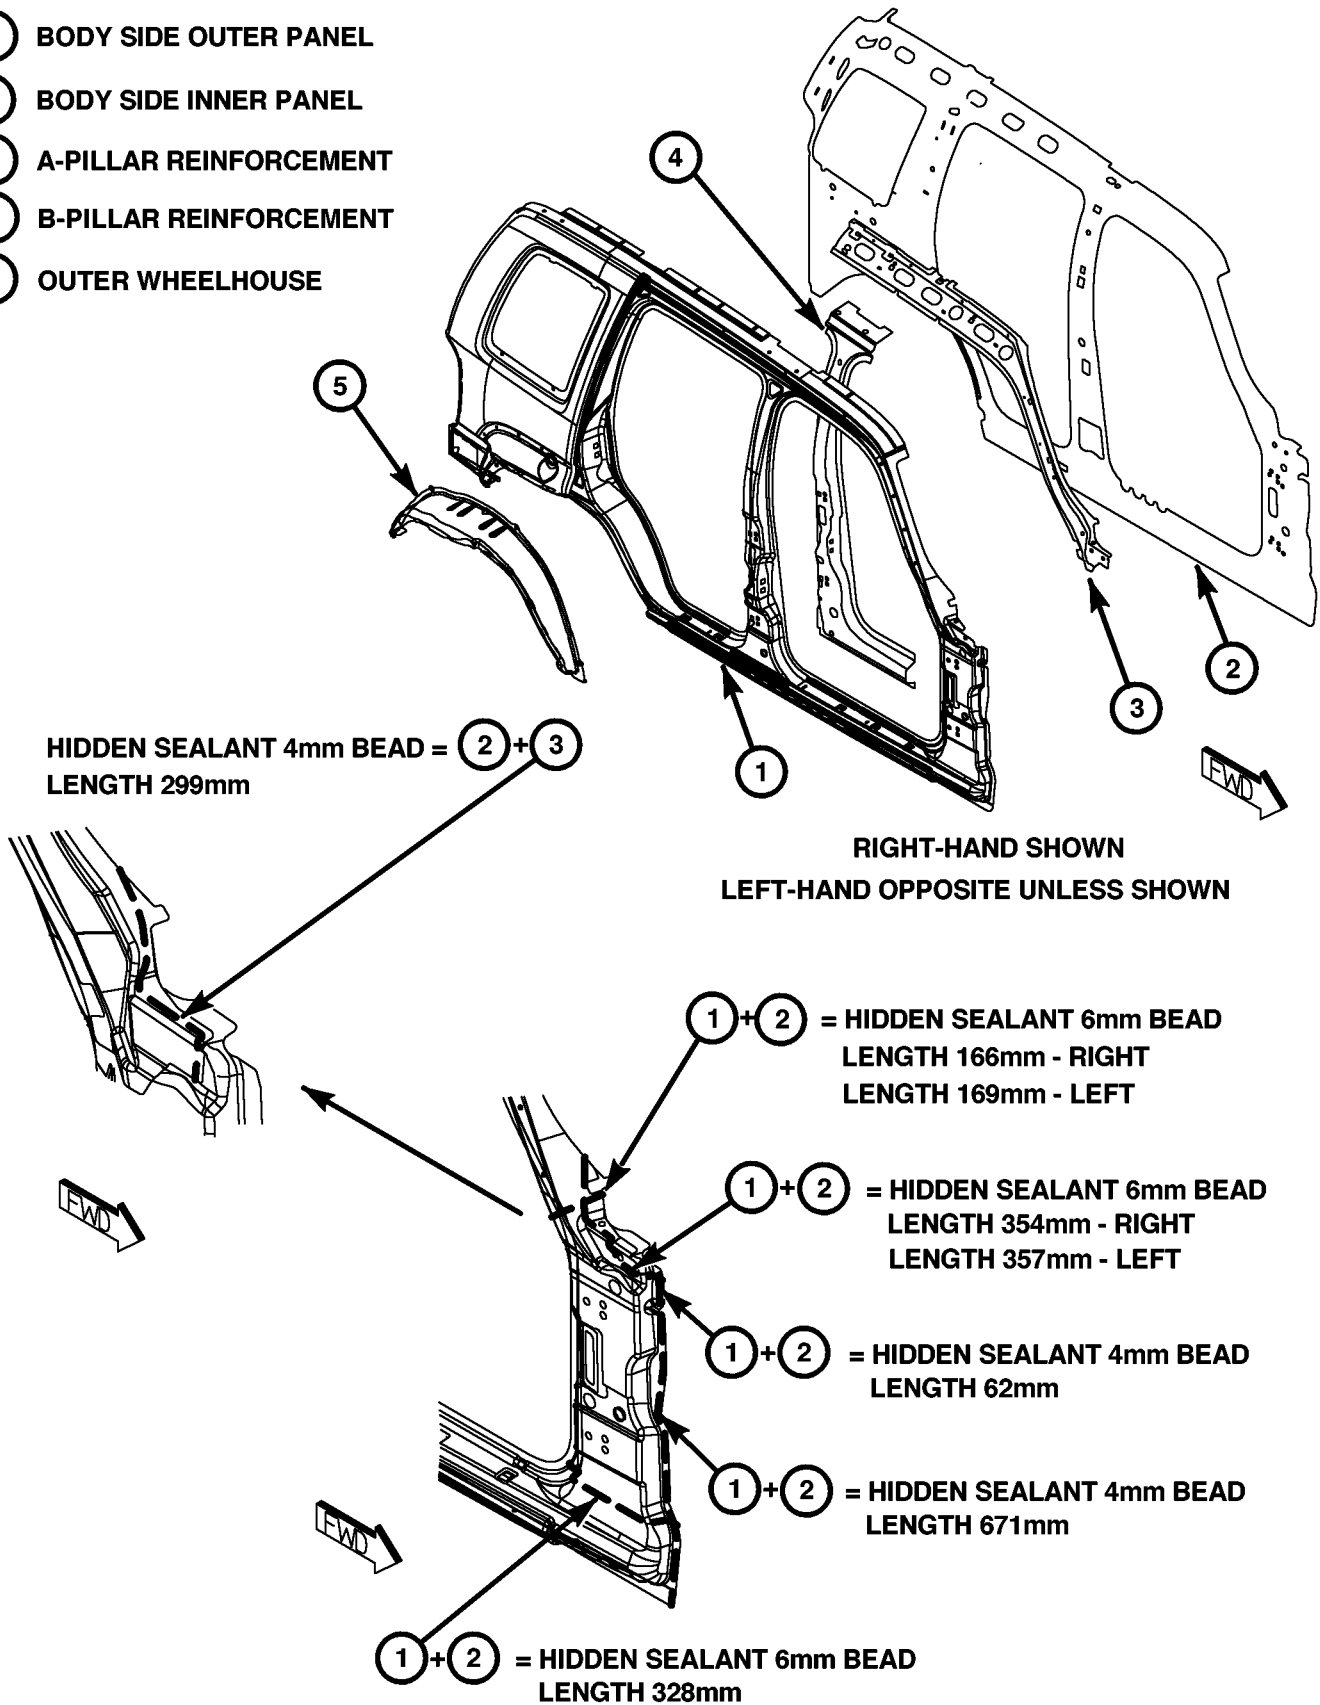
BODY SIDE PANEL ASSEMBLIES
